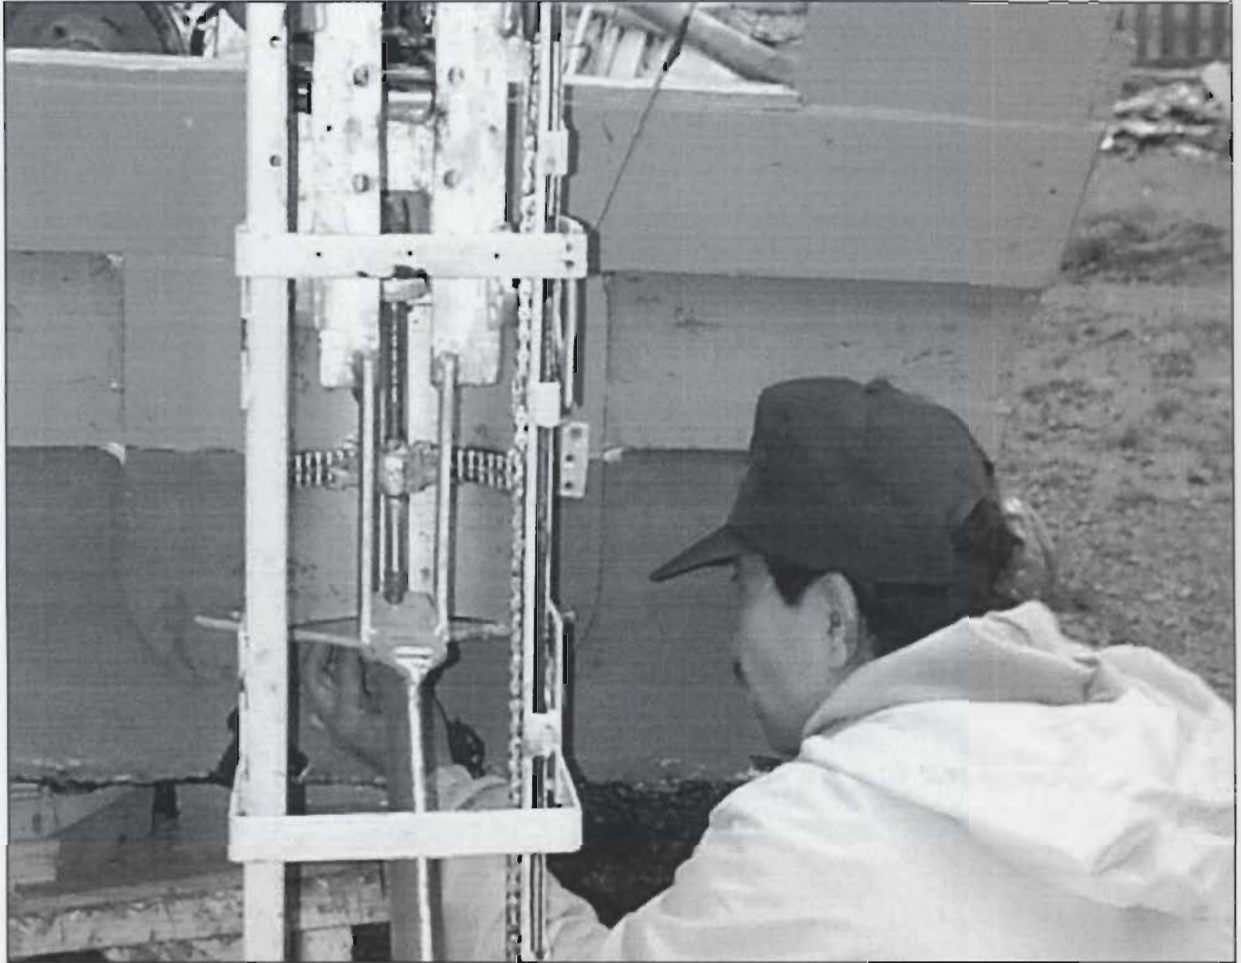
26 Inspecting the internal part of the slider guide assembly
